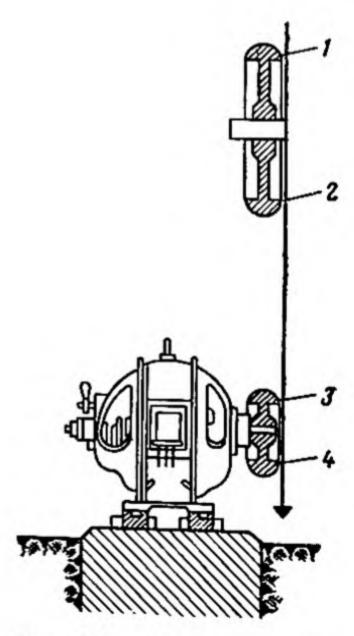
Aligning motor shaft for parallelism with follower pulley shaft in belt drive when both pulleys have the same width.
